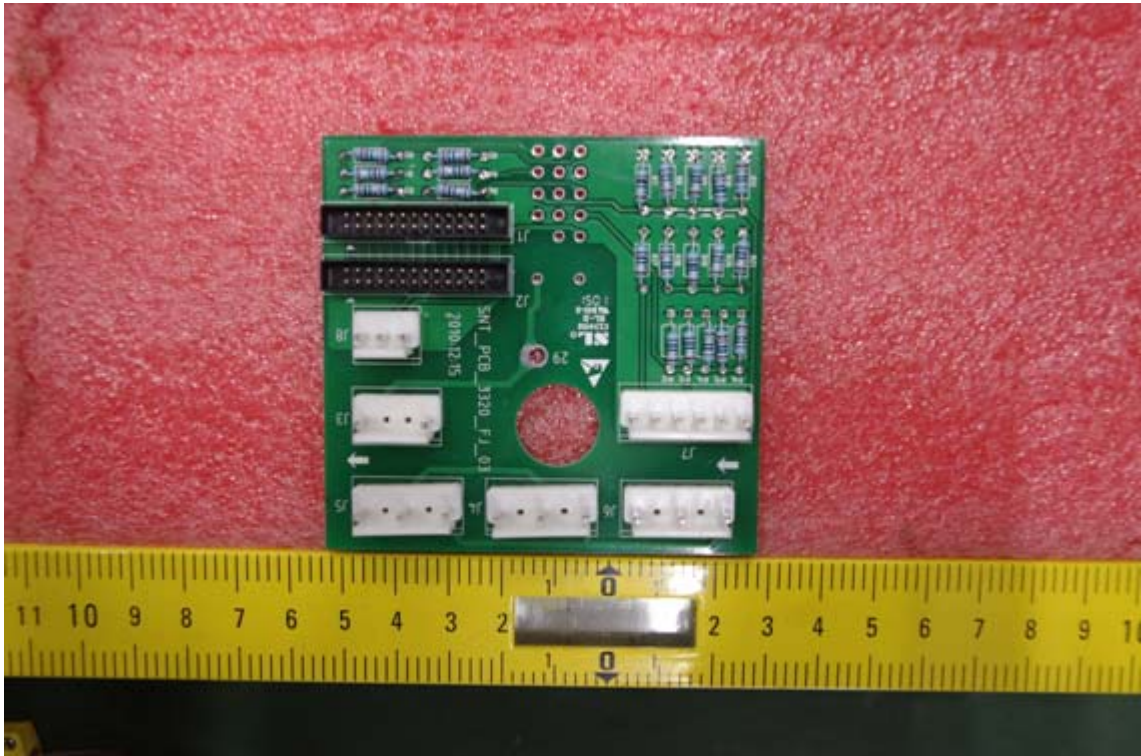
Board SNT_PCB_3320_FJ, component side view
